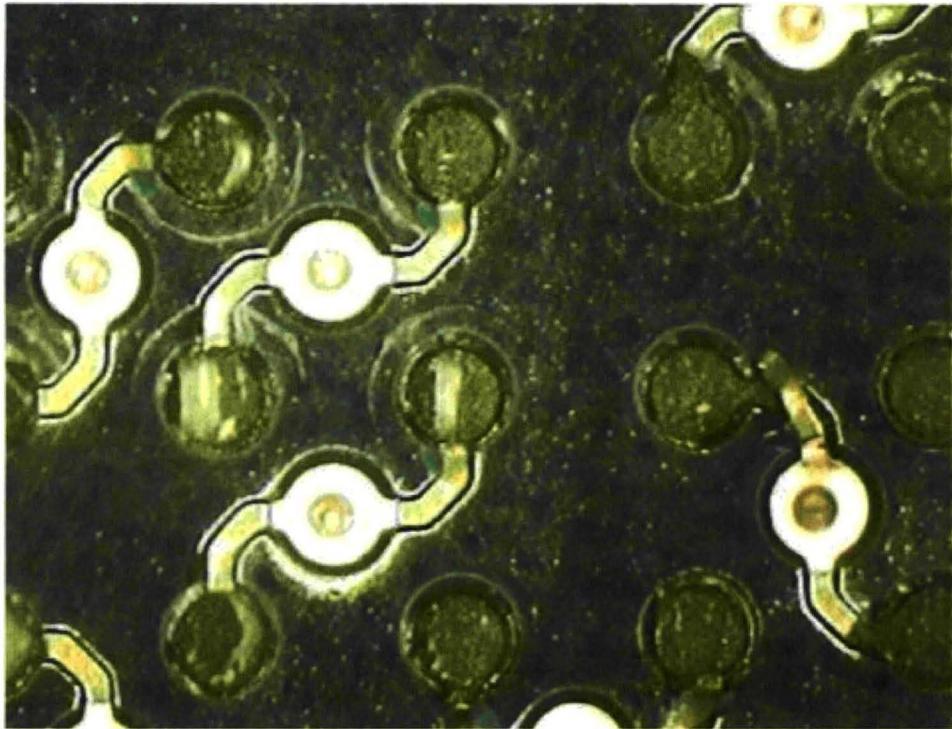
Test Vehicle 30 BGA U2 with Missing Pads (SnPb Solder/SnPb Balls)
